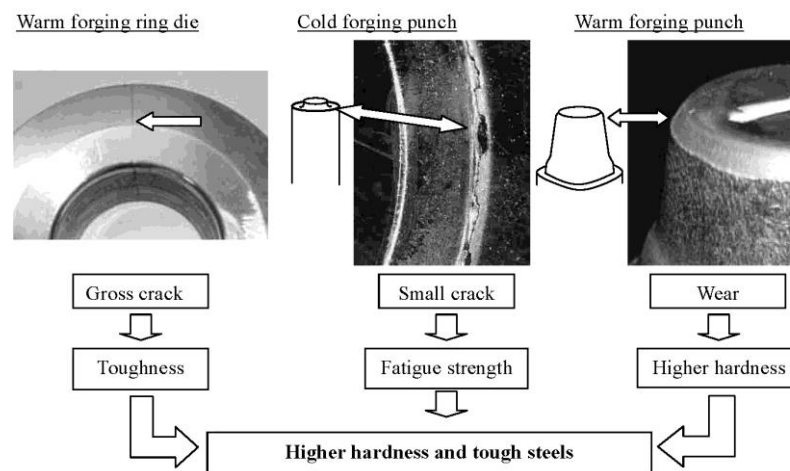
Examples of failed forging tools and countermeasure to enlarge forging tools life
